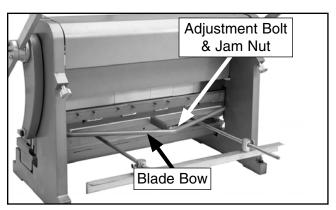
G4011Z and T26751Z blade bow adjustment bolt.
